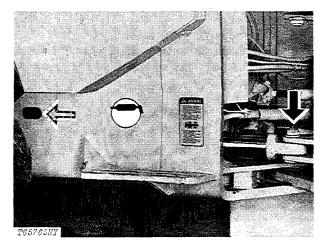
Steering Cylinder Pivot Pins (4 Points)
